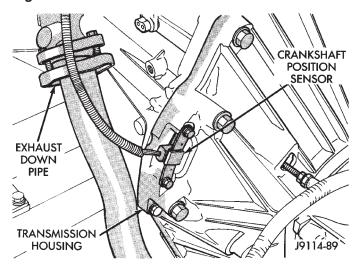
Crankshaft Position Sensor—2.5L Engine
